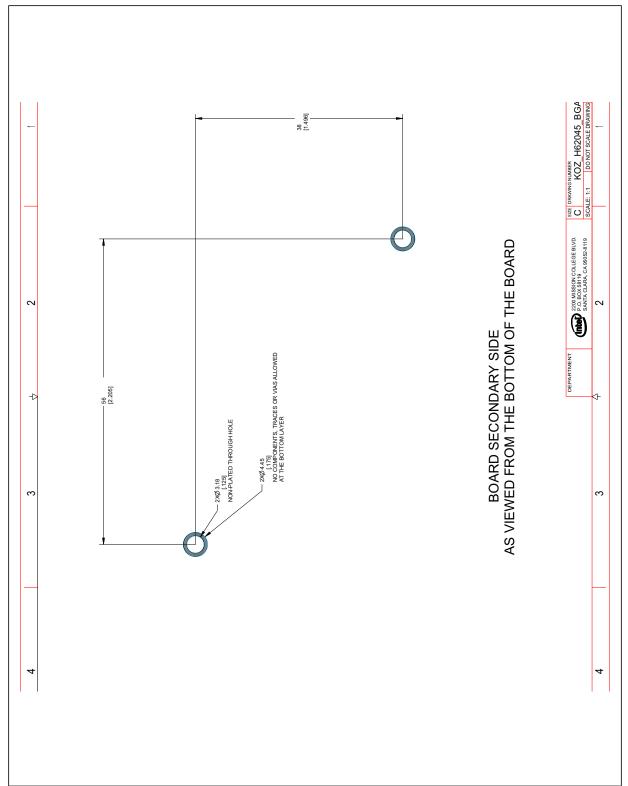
PCB Mechanical Keep-out Drawing - 2 Hole Heatsink (Sheet 2 of 2)
